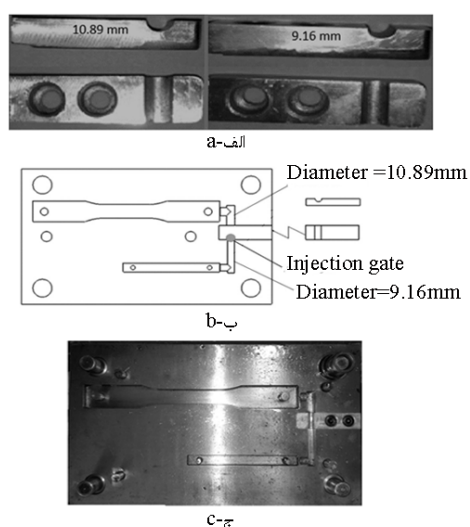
The manufactured a) inserts b) cavity plate and c) installation method of inserts
